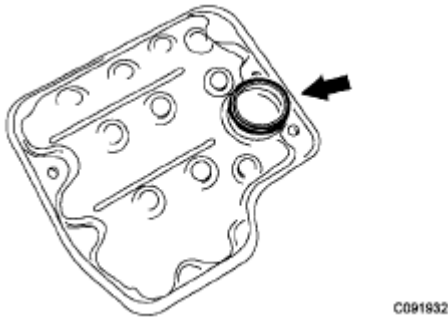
Locating Valve Body Oil Strainer O-Ring
